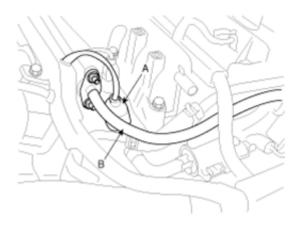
Identifying CMP Sensor Connector & Fuel Hose Courtesy of KIA MOTORS AMERICA, INC.
